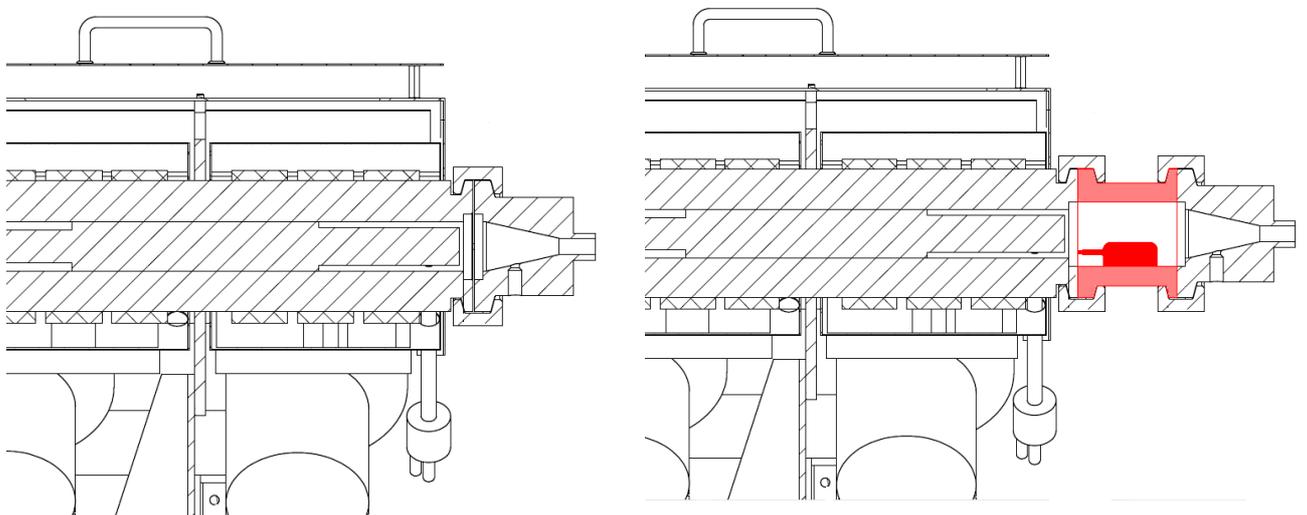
ILLUSTRATION VERY HIGH VISCOSITY SENSOR MOUNTING ON EXTRUDER
